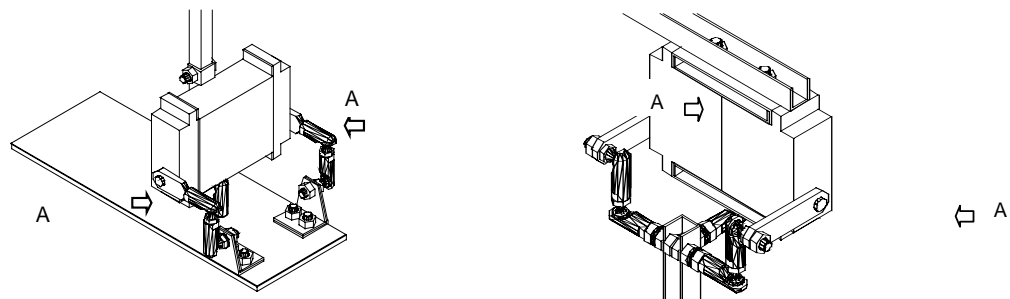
Detailed view of the ankle (left) and hip (right) joints
